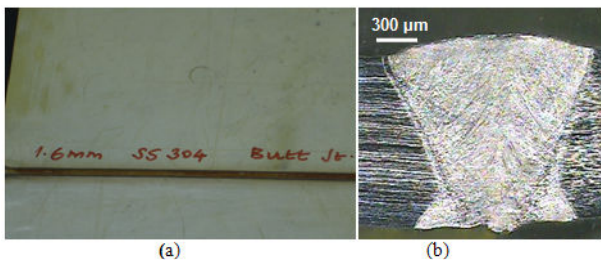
Weld bead profile of 1.6mm thick stainless steel sheet (a) Top surface and (b) Weld bead shape
